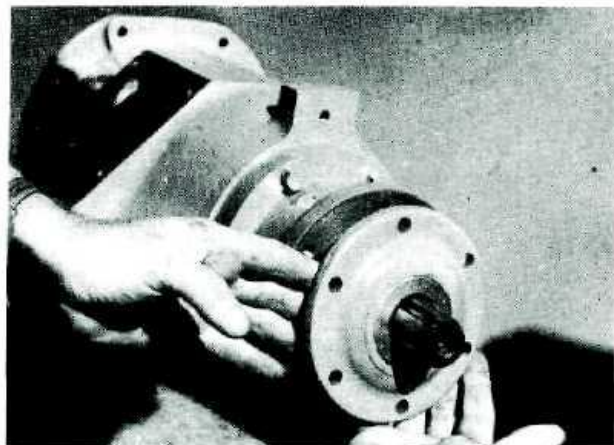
Removing Front Bearing Retainer (Prior to lever modification)
